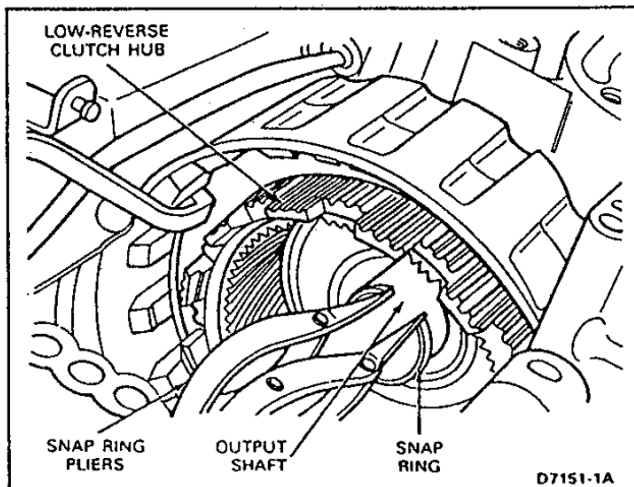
Removing or Installing Reverse Ring Gear Hub, Snap Ring
